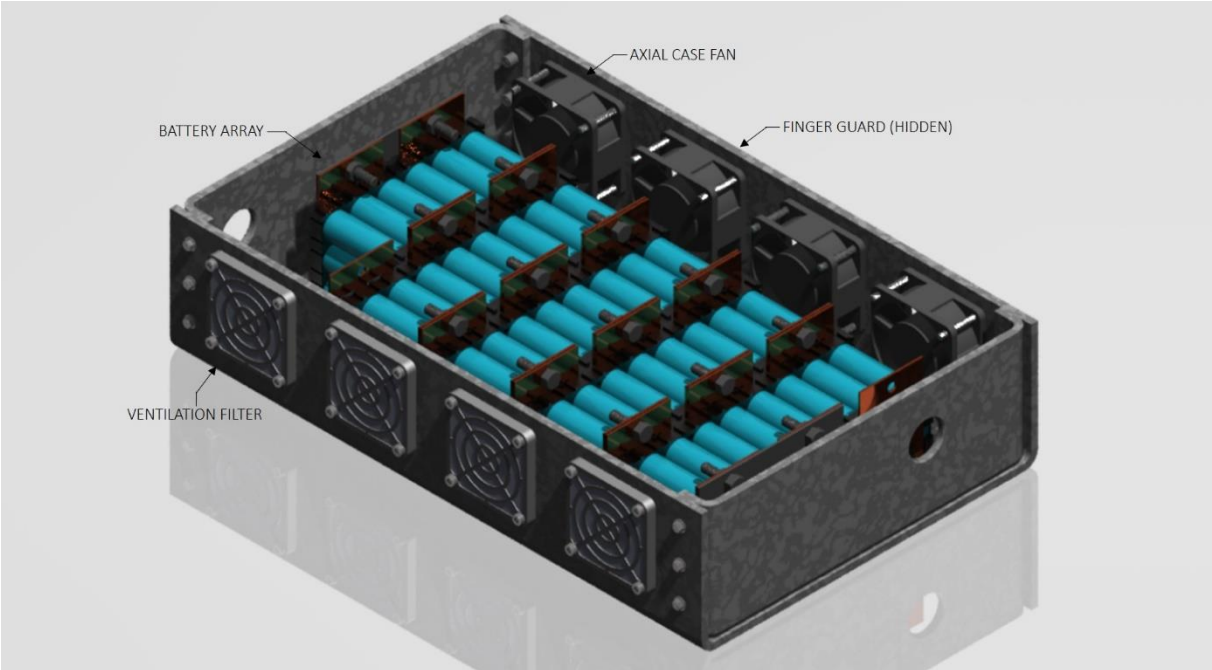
The isometric-view of the fully assembled ESS inclusive of the enclosure, BARR, finger guards, VFs, and ACFs.
